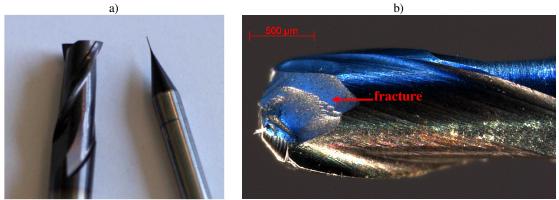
Carbide micro end mills: a) comparison of micro mill (diameter: 0,2 mm) with conventional end mill (diameter: 6 mm); b) catastrophic tool's failure by the fracture of the working part (diameter: 1 mm). Own elaboration
